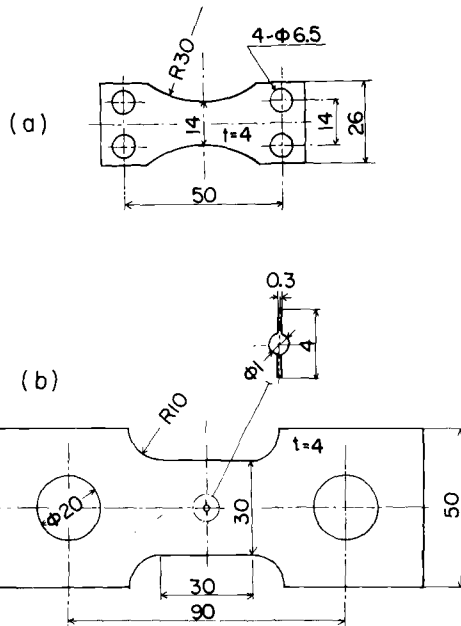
Test specimens (dimensions are in mm): (a) smooth specimen for fatigue experiment and (b) notched specimen for fatigue crack propagation experiment.
